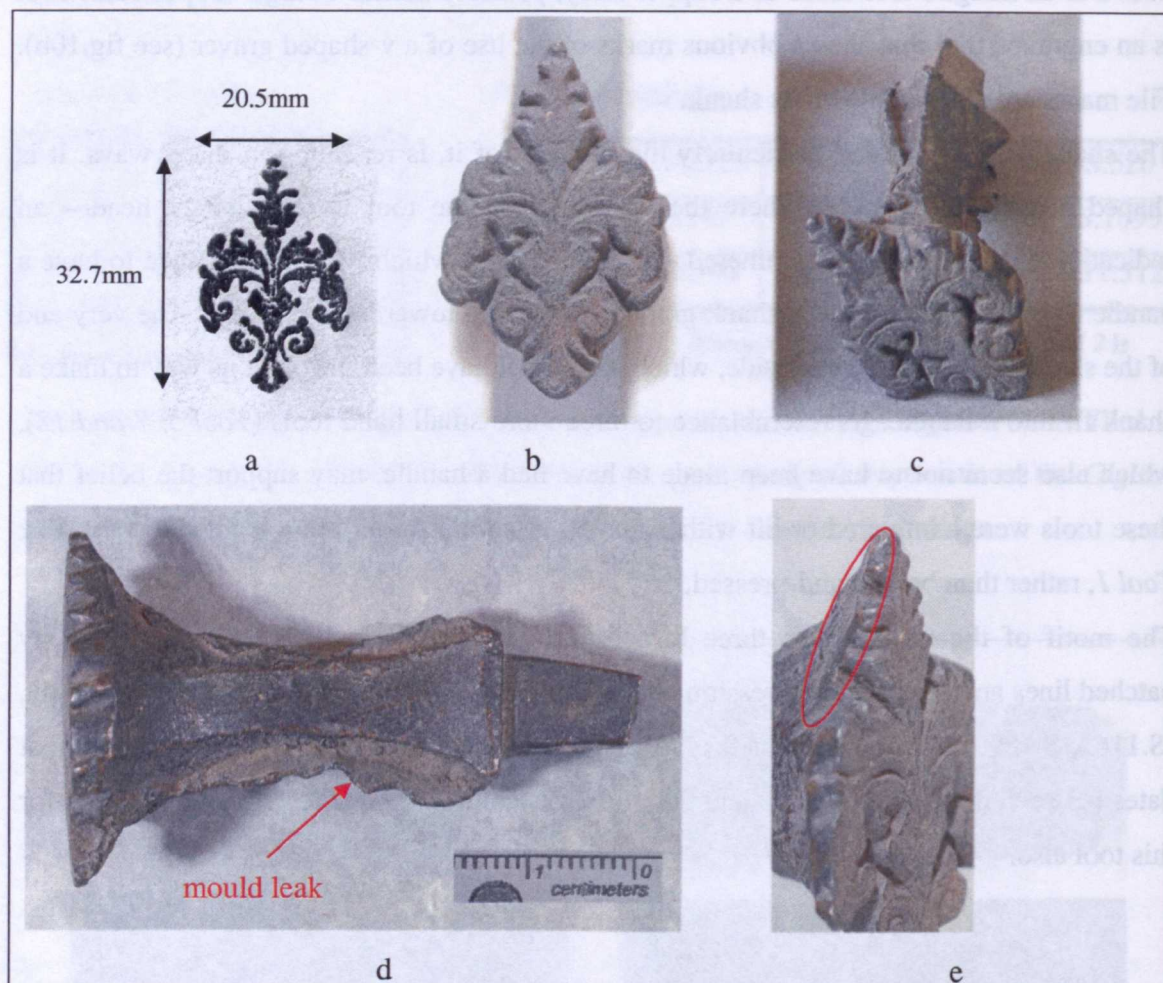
Tool 4: a) true size ink proof, b) photograph of face, c) perspective view, d) side view, e) detail of a line that must be a joint between the face and the shank
